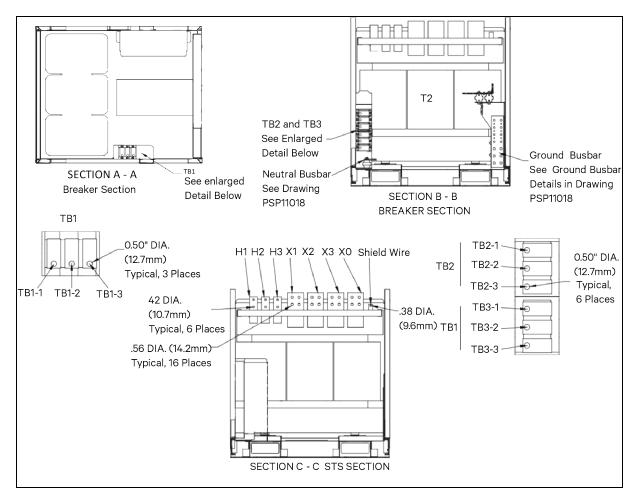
Electrical Field Connections, 800A Vertiv™ Liebert® STS2 / PDU Interconnect Wiring, Breaker Section
